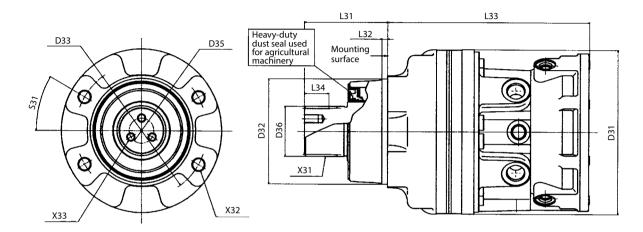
Dimensions for a face mounting type unit (with brakes)
